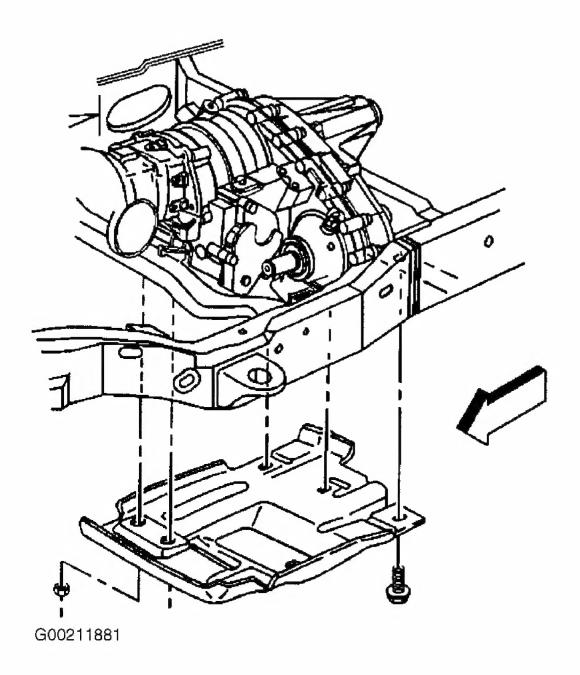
Identifying Transfer Case Shield Mounting Bolts Courtesy of GENERAL MOTORS CORP.
